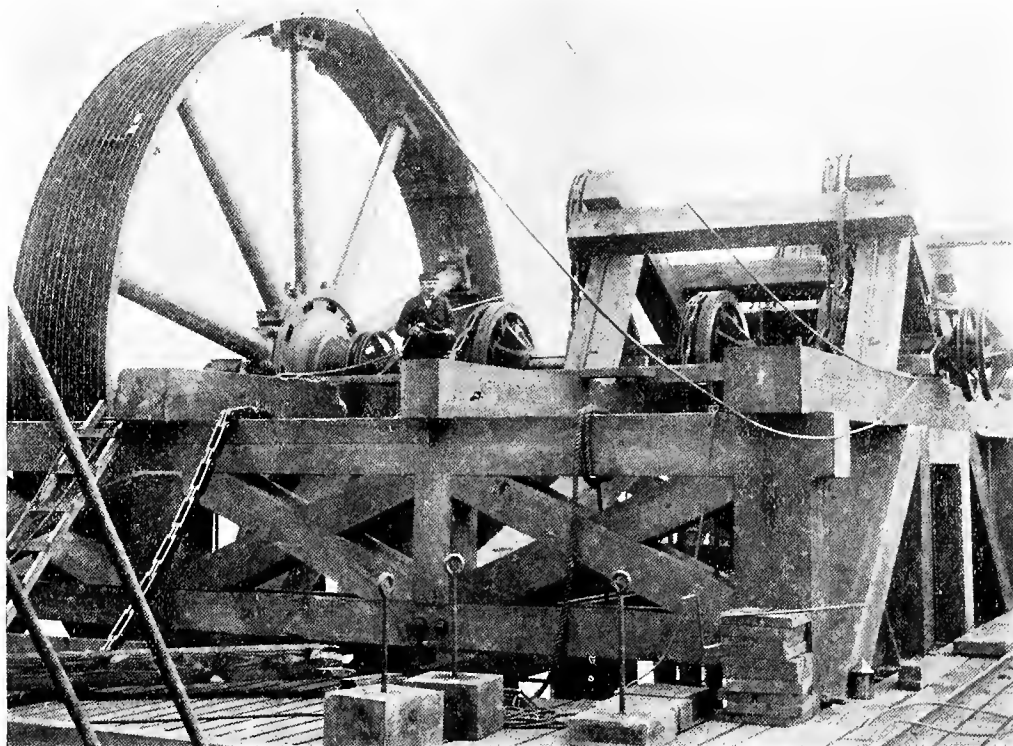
Main Shaft of the Gerlach Wave Motor, showing the Sprocket Wheels and Toggle Grips.
